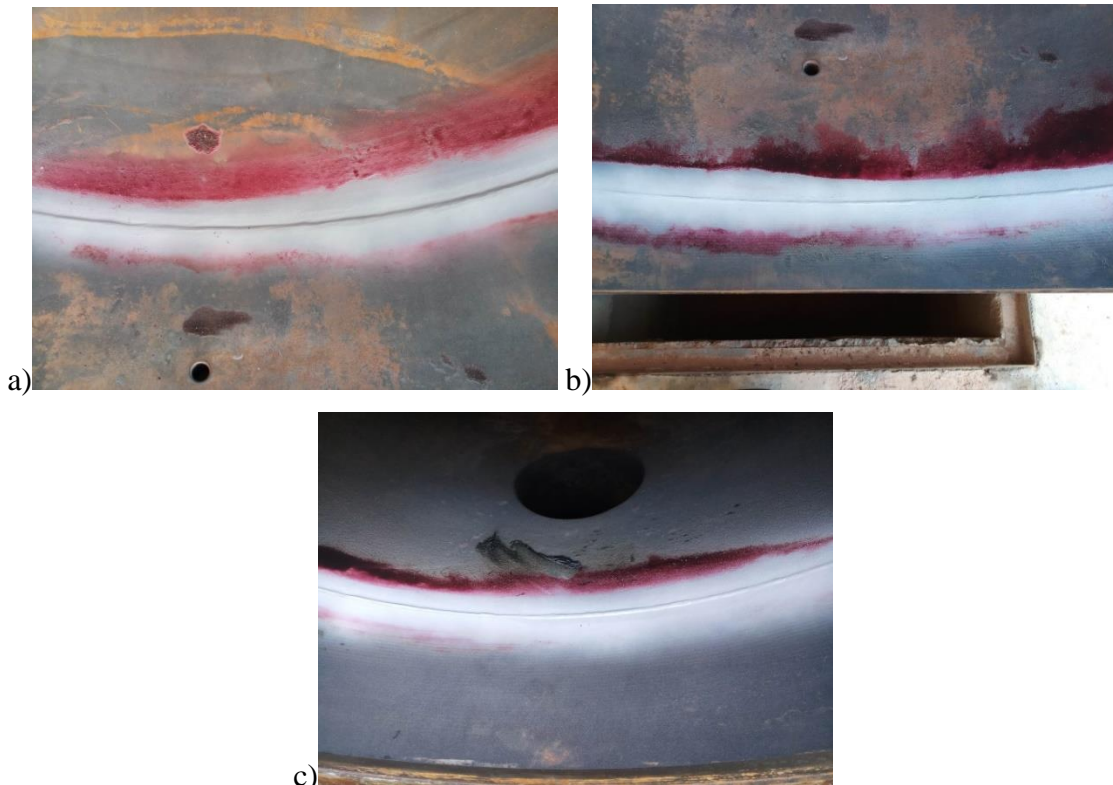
Results of PT tested of the weld joints a) 1 b)2 and c)6.
